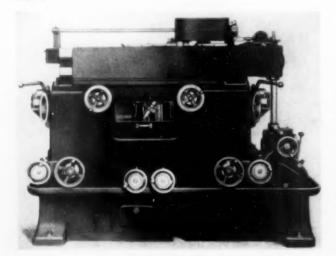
shows a Maag Gear Grinder. This is a two-wheel type of grinder that uses a pitch drum to produce the involute, and an electrically controlled index mechanism for spacing. The work is mounted on a table that travels under the wheel as the gear oscillates. The wheels grind on the flat side, and are set at a constant angle. Various pressure angles are produced by modifying the pitch drum used. The machine is suitable for spur or helical gears.
